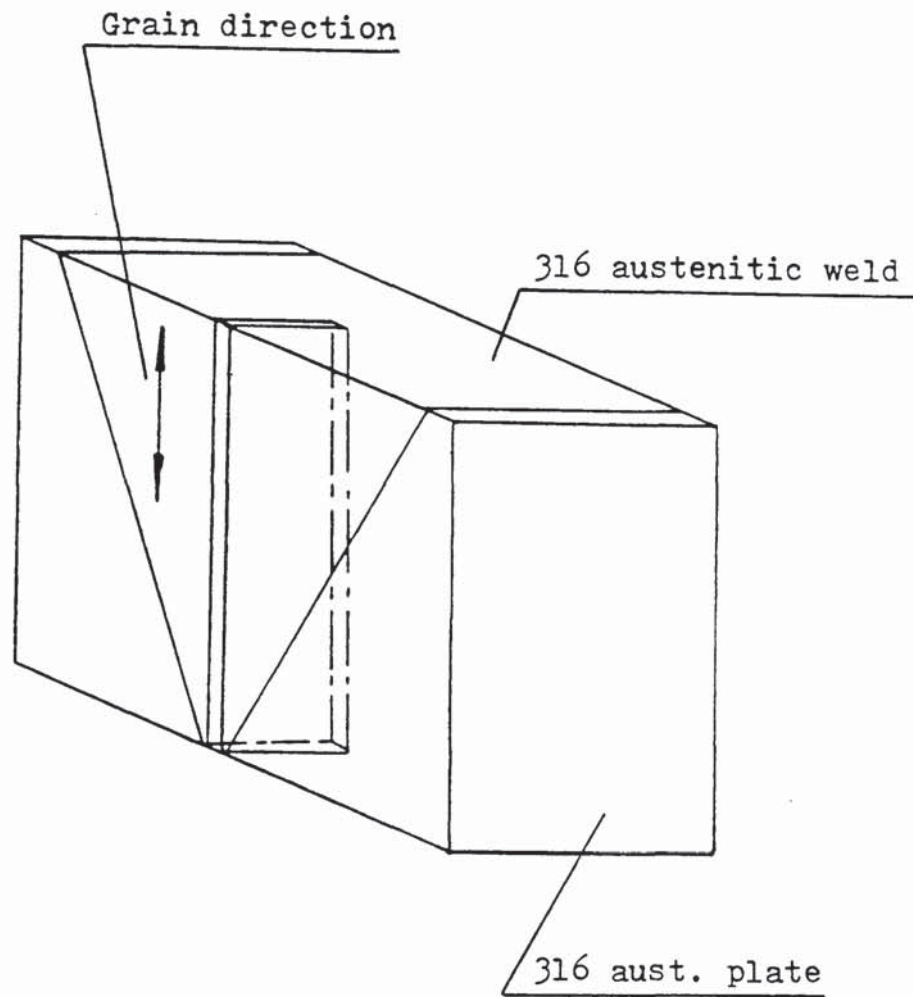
Strip cut from a 316 Single-V austenitic weld to be used for preferred orientation measurements by the SAECPS technique
